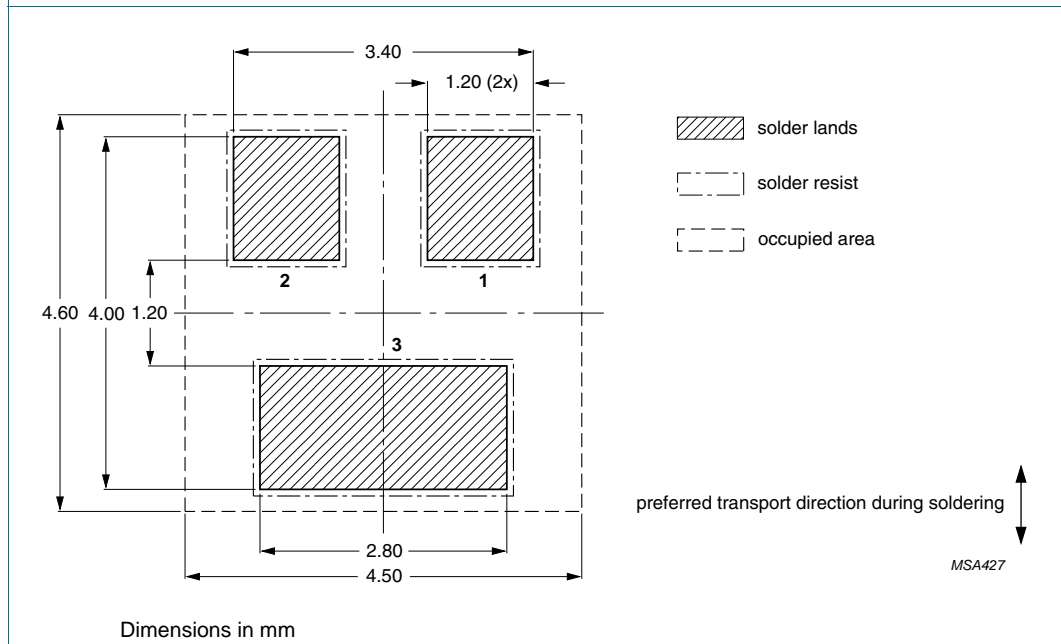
Wave soldering footprint SOT23 (TO-236AB)
